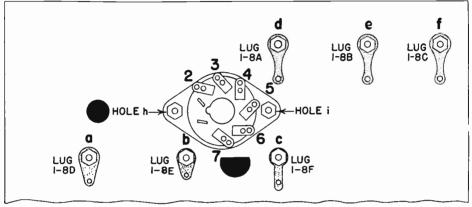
Your chassis should appear exactly like this after you complete Step 1 in Experiment 9.
